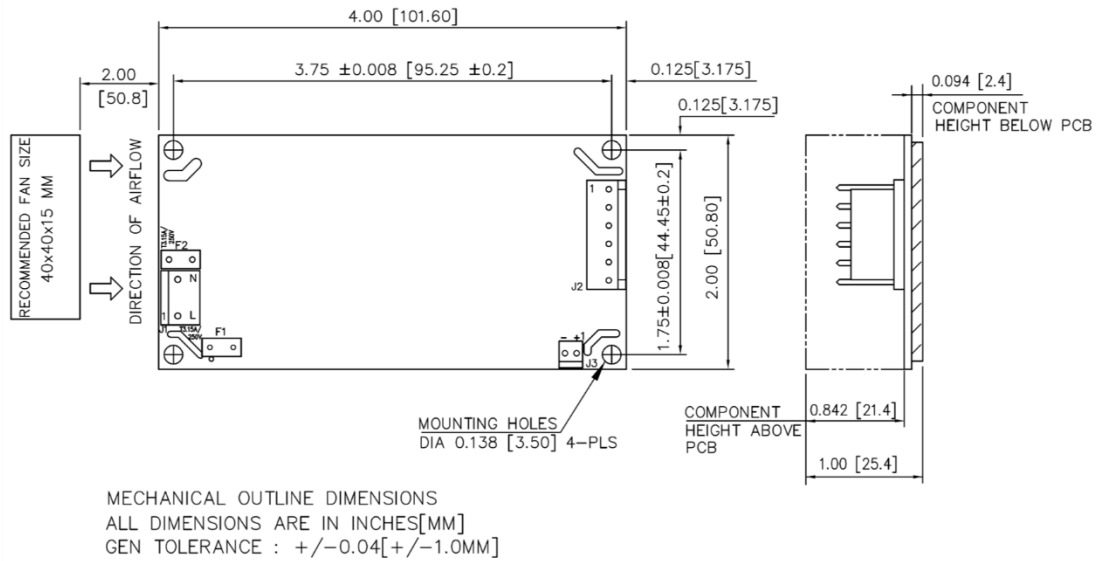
Mechanical Drawing – Molex Connector (Option 2)
